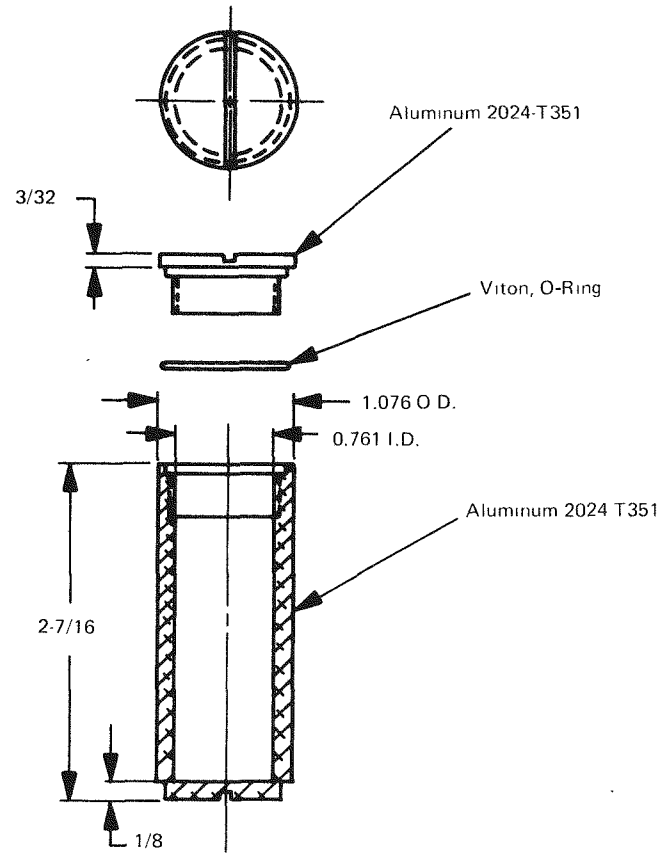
Plutonium outer capsule (dimensions in in.).
